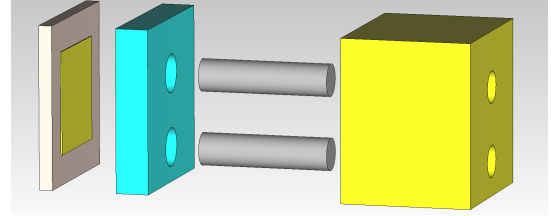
Exploded view of the proposed unit element. From left to right, the picture shows; the substrate layer with the patch, the PP layer, the pin actuator pins, and the ground layer.
